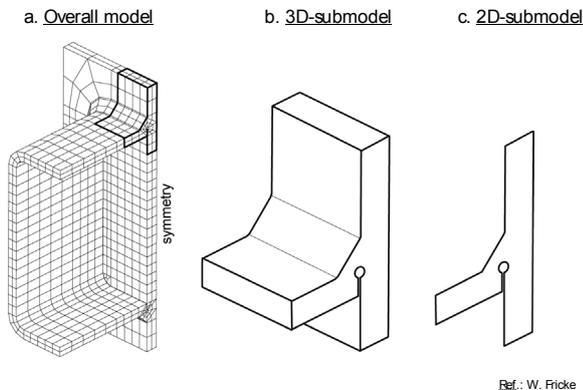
FE-modelling of a fillet-welded end joint of a rectangular hollow section
